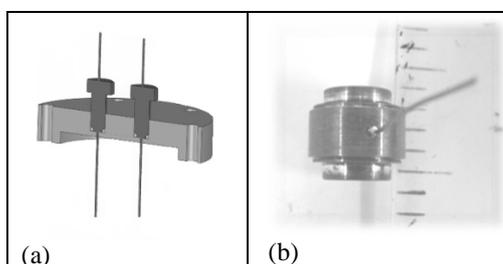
(a) 3D drawing of cryogenic feedthrough (b) Laser welded copper pin on trap electrode
